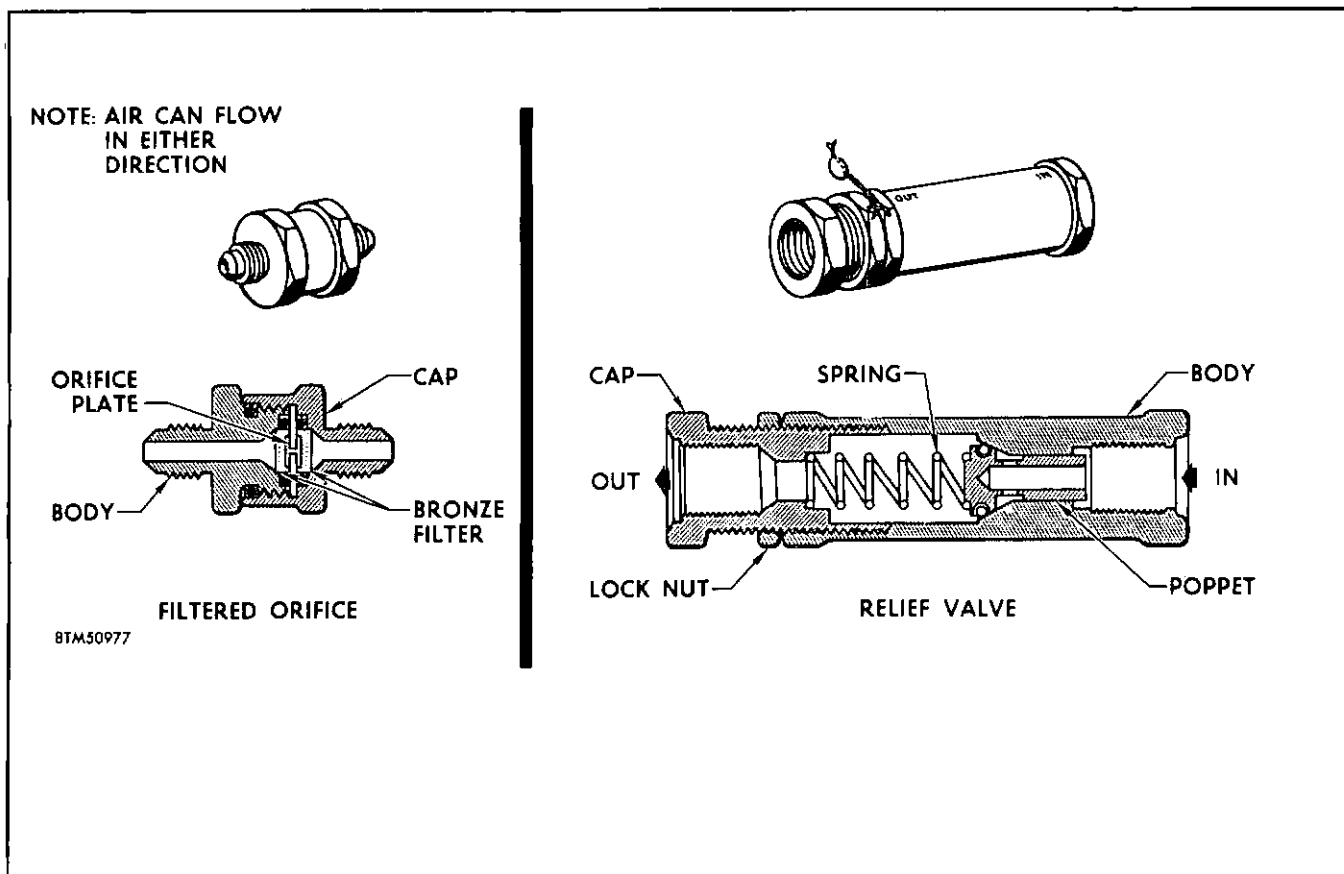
Canopy Seal Relief Valve and Filtered Orifice
